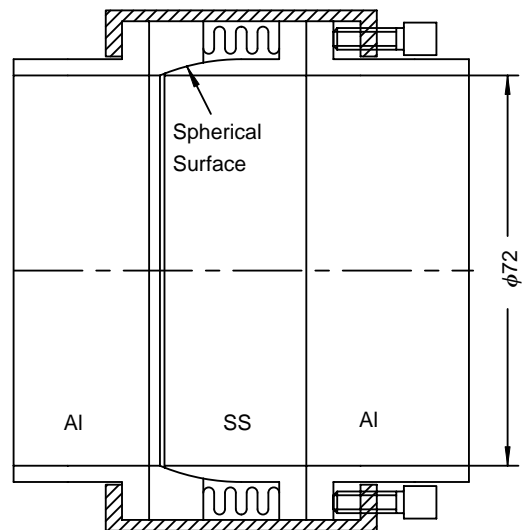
Schematic drawing of the special short bellows used to bend a beam duct slightly.
